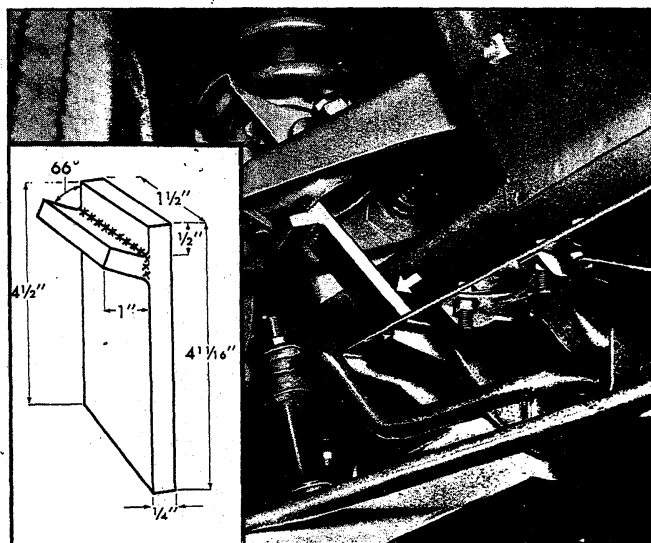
Upper Control Arm Support Installed - Chevy II
